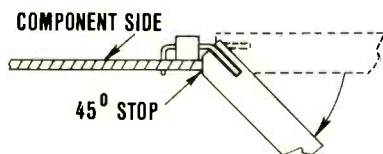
A SPECIAL BENDING TOOL—supplied in the complete kit—is recommended for forming the header strip lugs.
